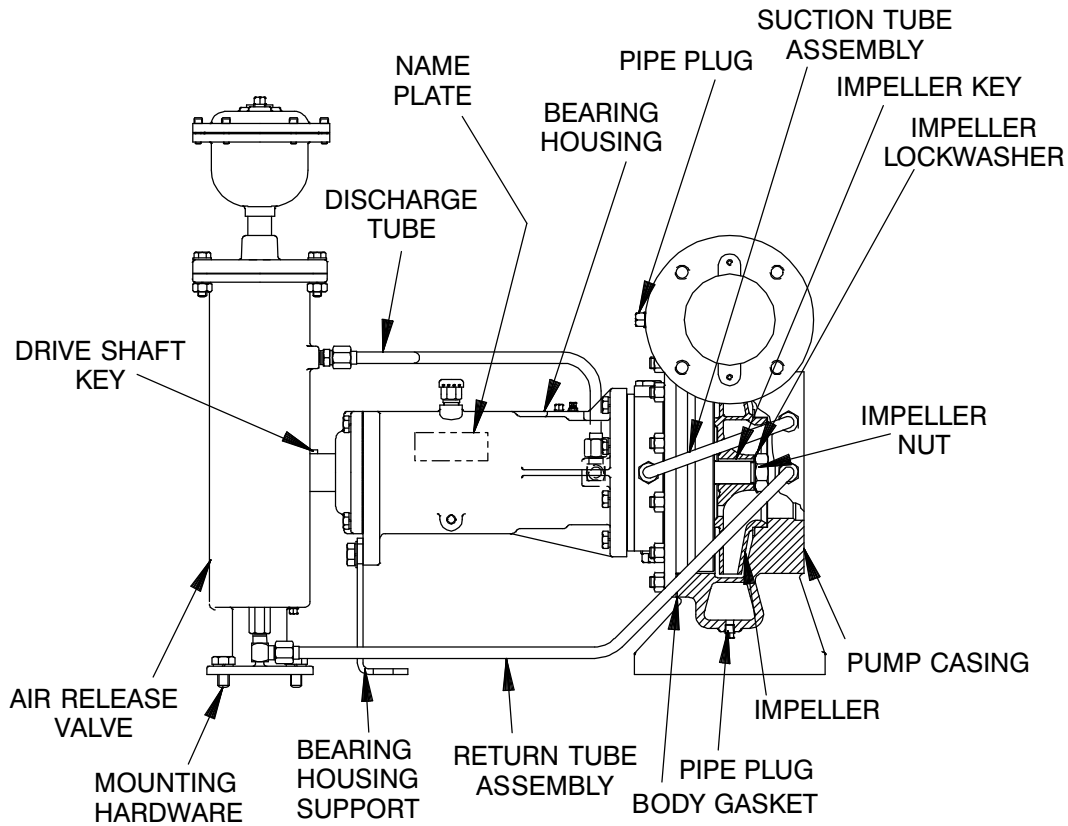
Typical RD Model Pump Assembly ("BAR" Version)
